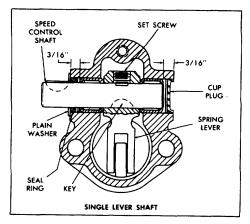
Cross Section of Governor Variable Speed Spring Housing
